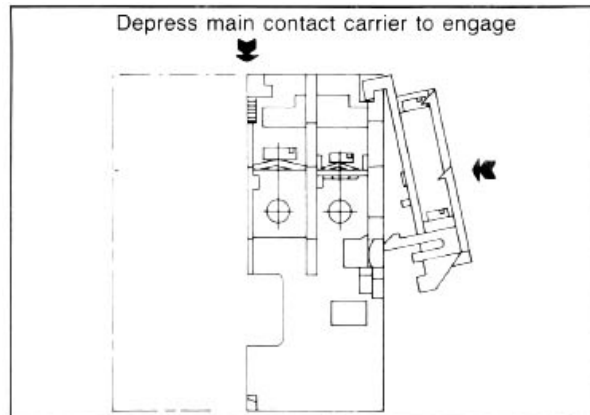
Fitting of Side Mounted Auxiliary Contact Block
